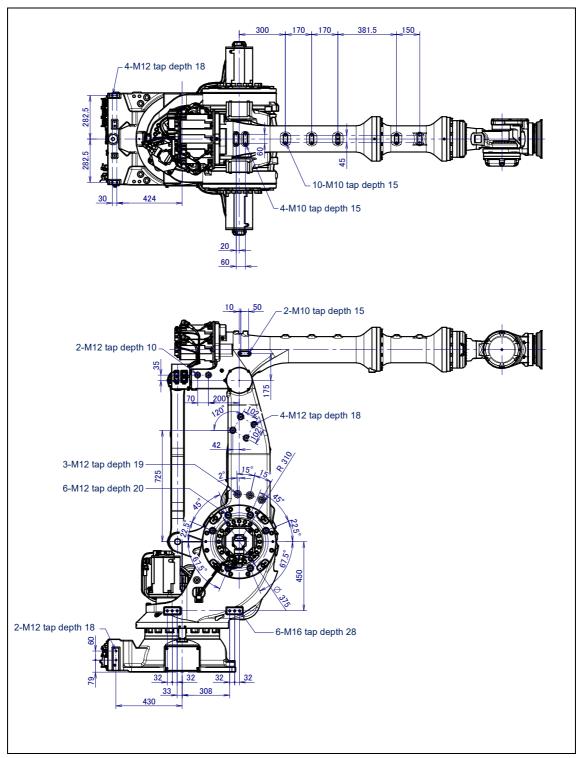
(c) Equipment mounting faces (M-900*i*B/280L (1/2))
